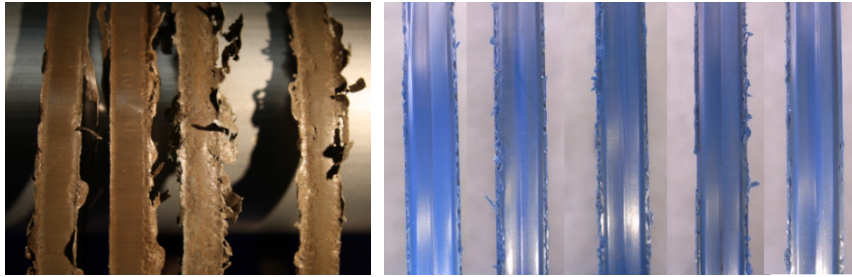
PTFE (left) and PU Seal (98 AU 30500, right) after the Endurance Test.
